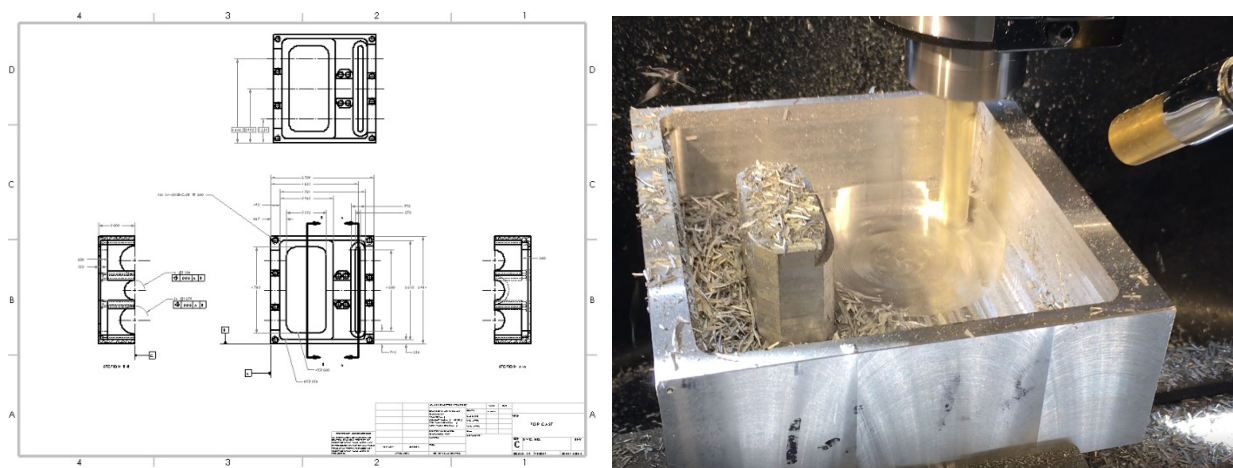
Upper Case Drawing and Final Machining of Housings on CNC Mill
